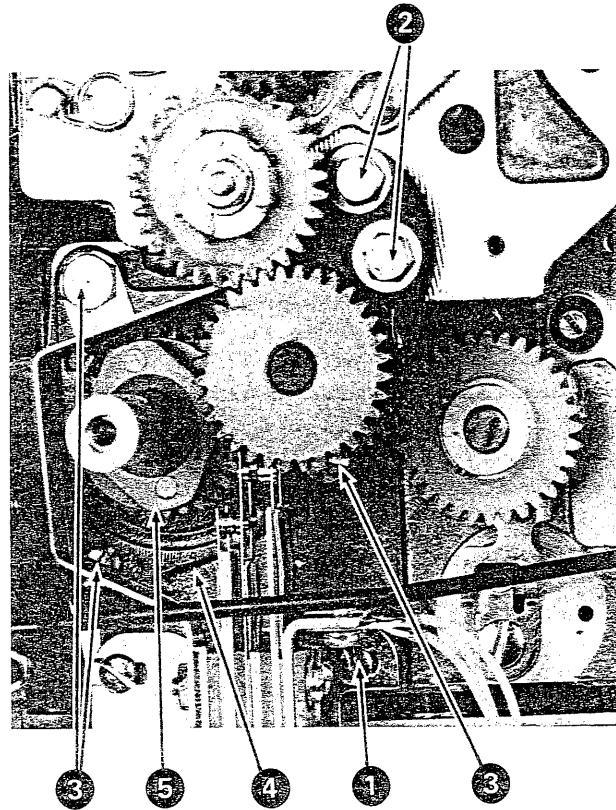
Cycle-Clutch and Cycle-Shaft Removal (Steps 9-13)
